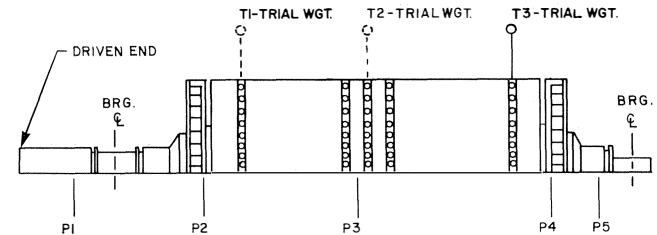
Sketch of Rotor Indicating Trial Weight and Non-Contact Probe Locations.
